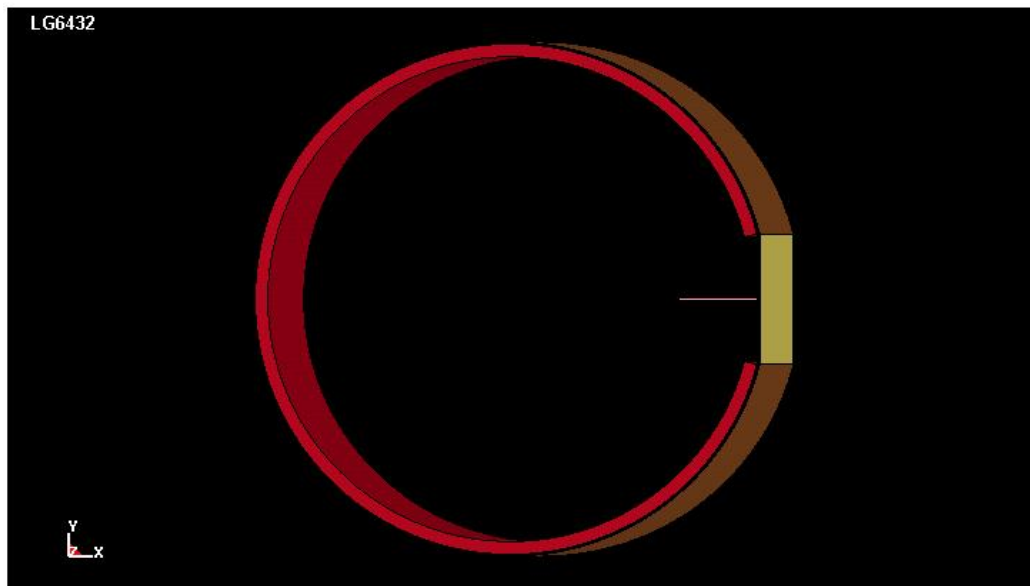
Top view of the assembly with (zero rotation about the roll, pitch and yaw axis)
